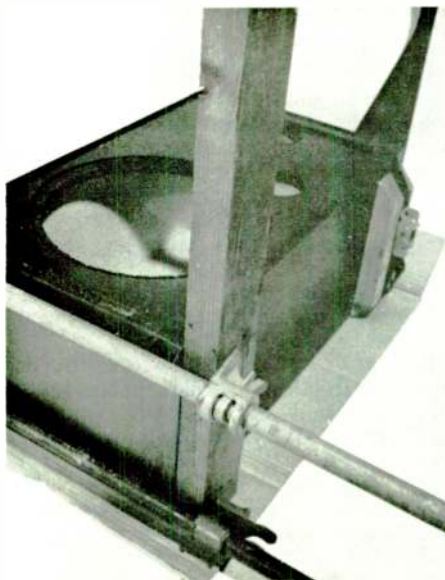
We used pipe clamps and a strap clamp on the cabinet but books or bricks would have served as well. Drying time: 3 hours.
